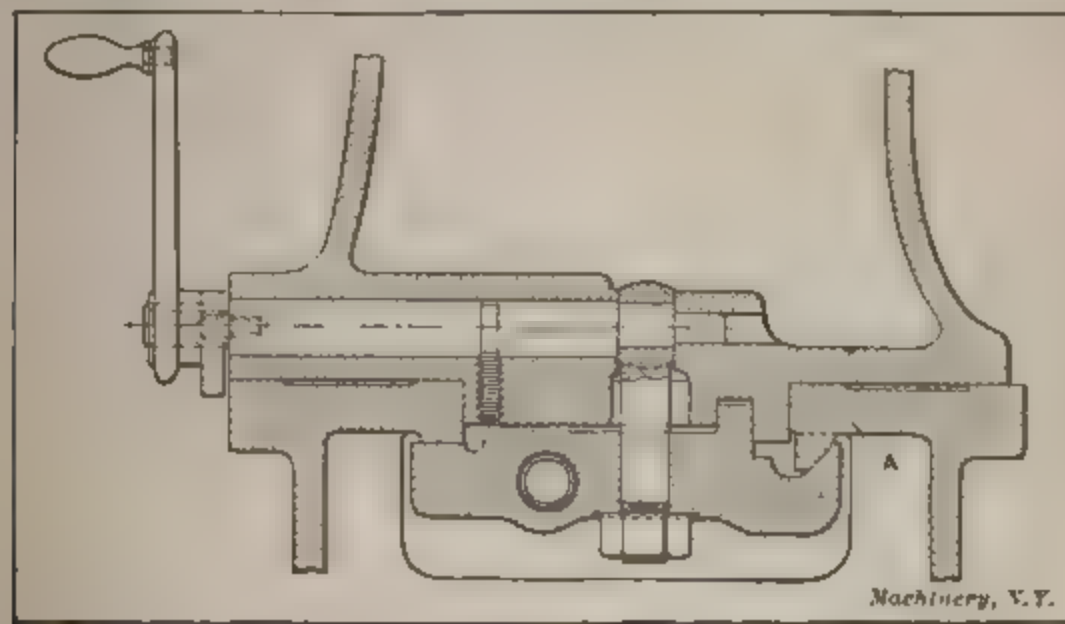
Eccentric Action Clamping Device used on Chucking Lathes
